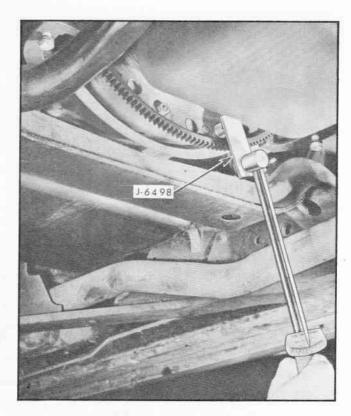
Strato-Flight Torque Wrench Extension J-6498
